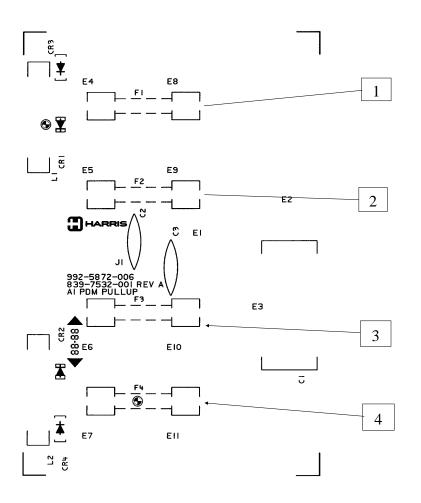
PDM Pull-Up Board, Controls and Indicators
